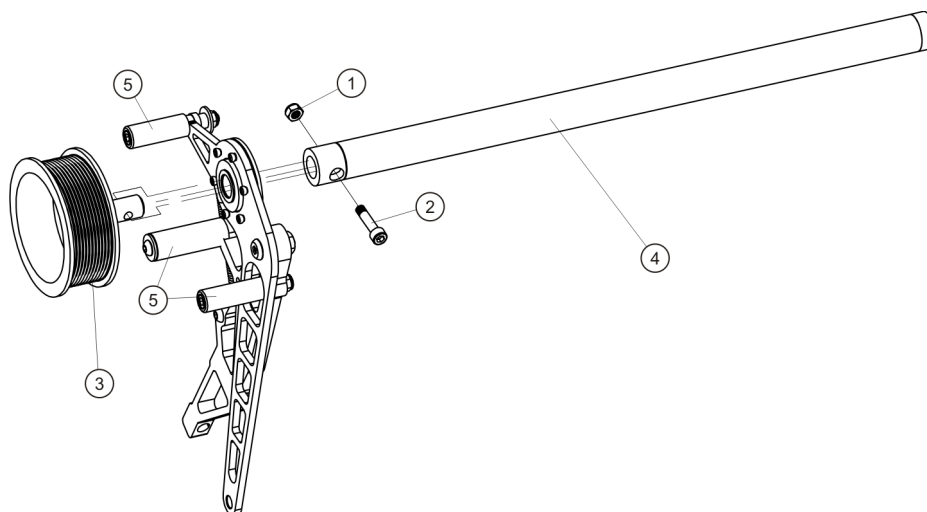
Pre-rotator clutch - small pulley, bearing and lower drive shaft
